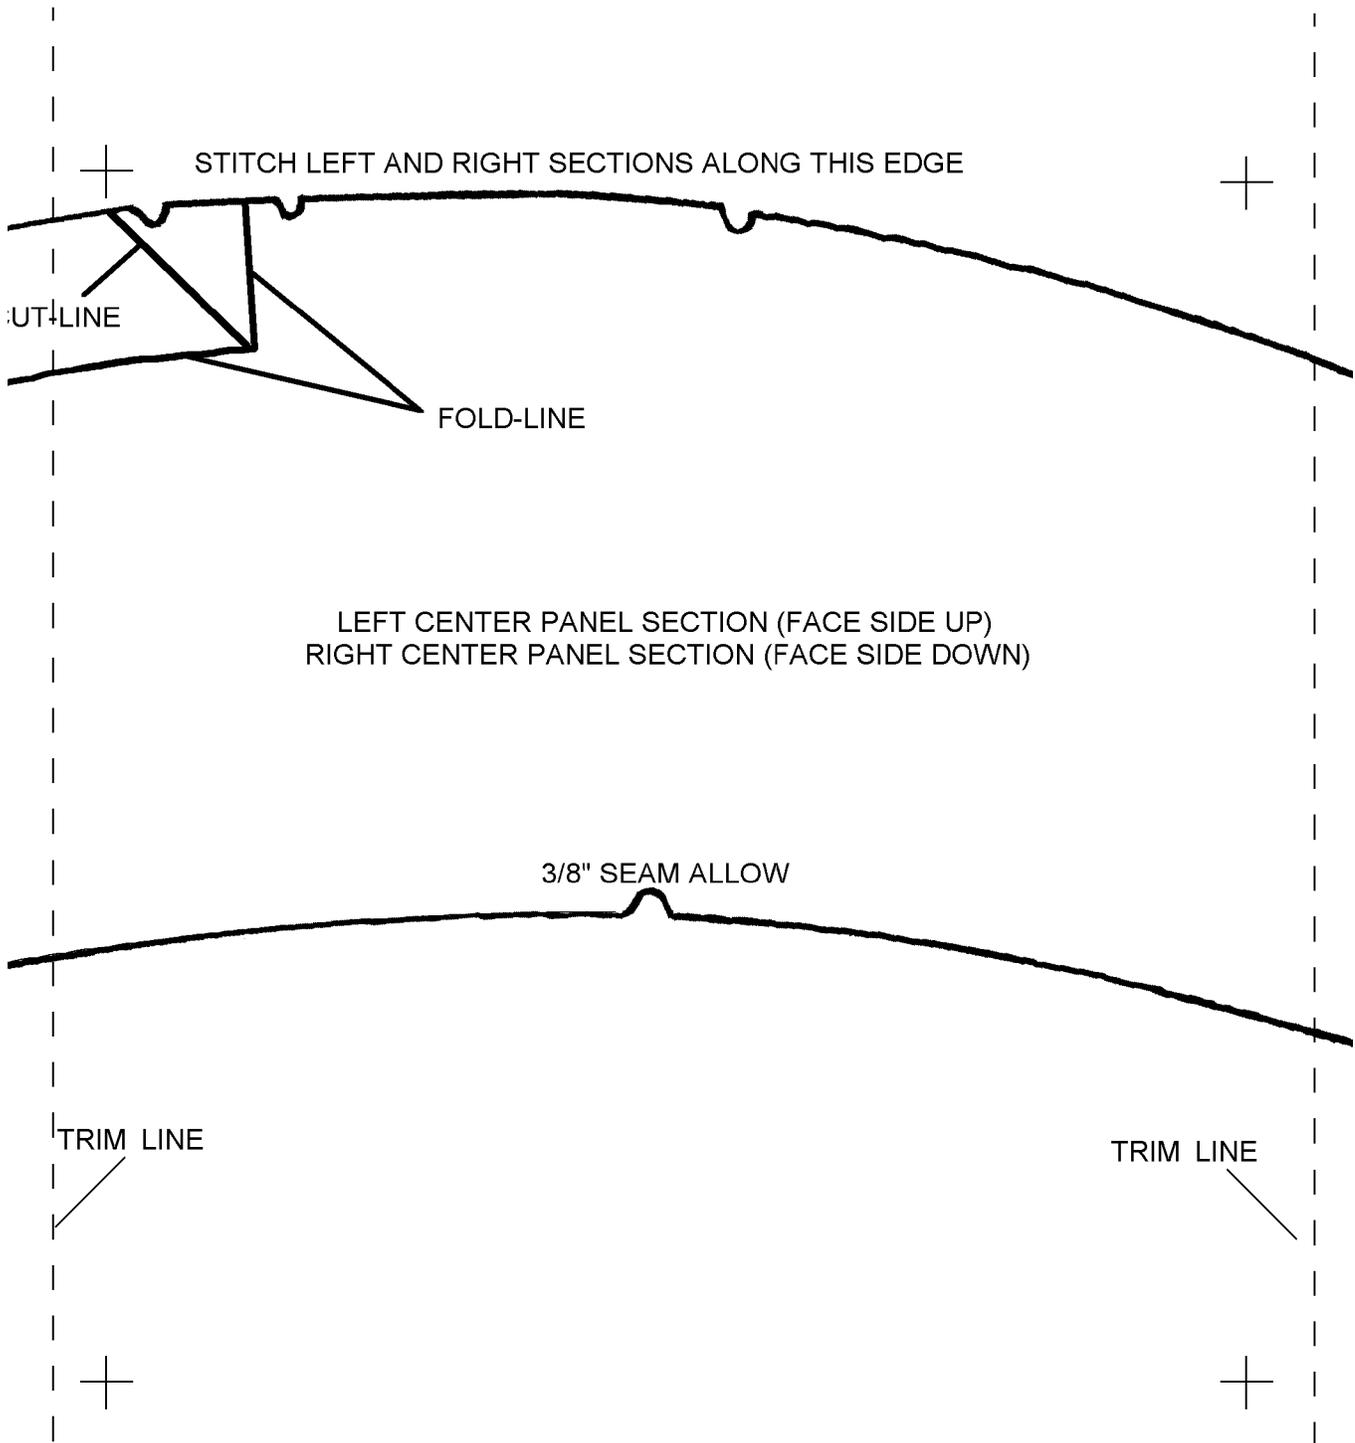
Removable Camouflage Helmet Cover (Extra-Large) (2 of 5)
